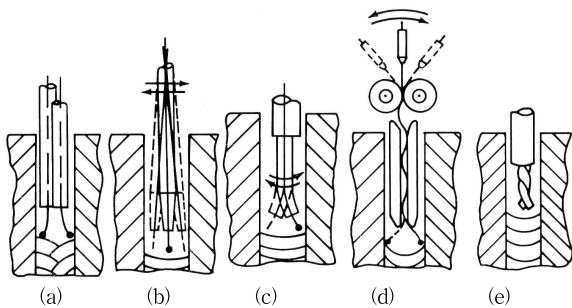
Various types of wire feeding techniques for narrow gap welding
